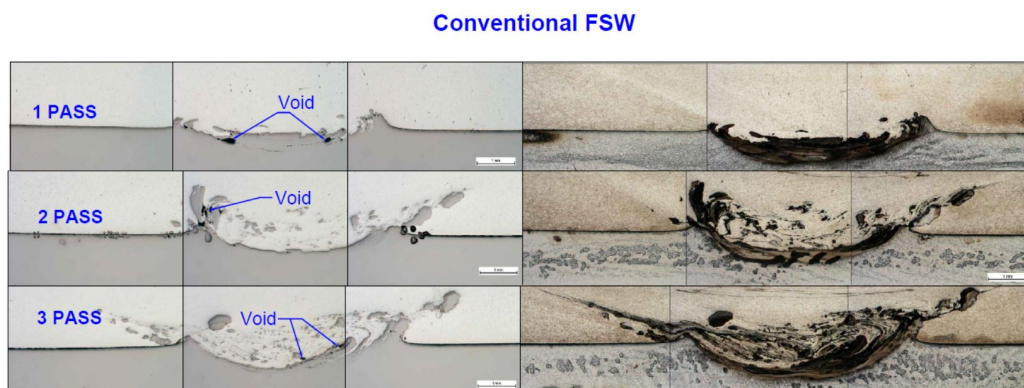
Optical macrographs of multi-pass welds with conventional faying surface which were carried out as same welding parameters as weld 3.
